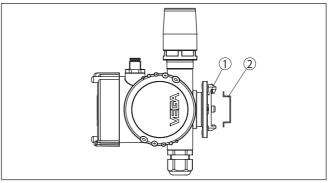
PLICSMOBILE T81 for carrier rail mounting
